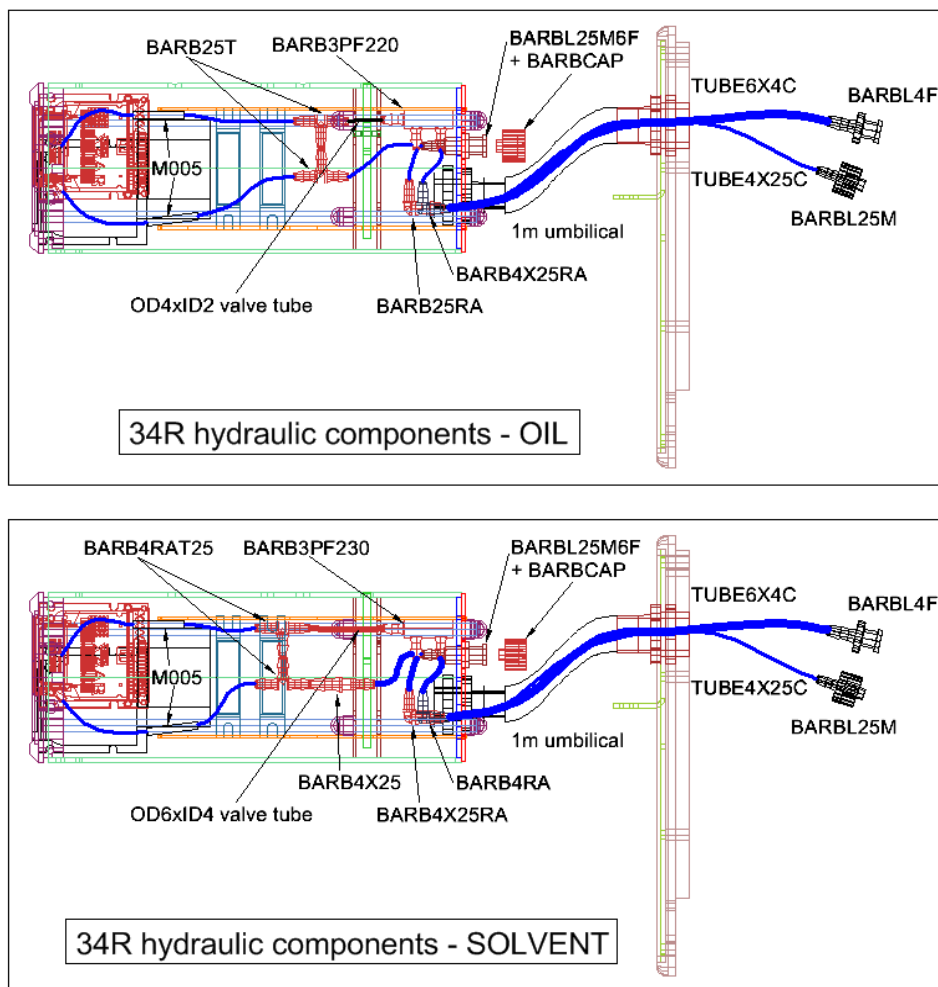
34R (TZ 34) print-head tubes and fittings
